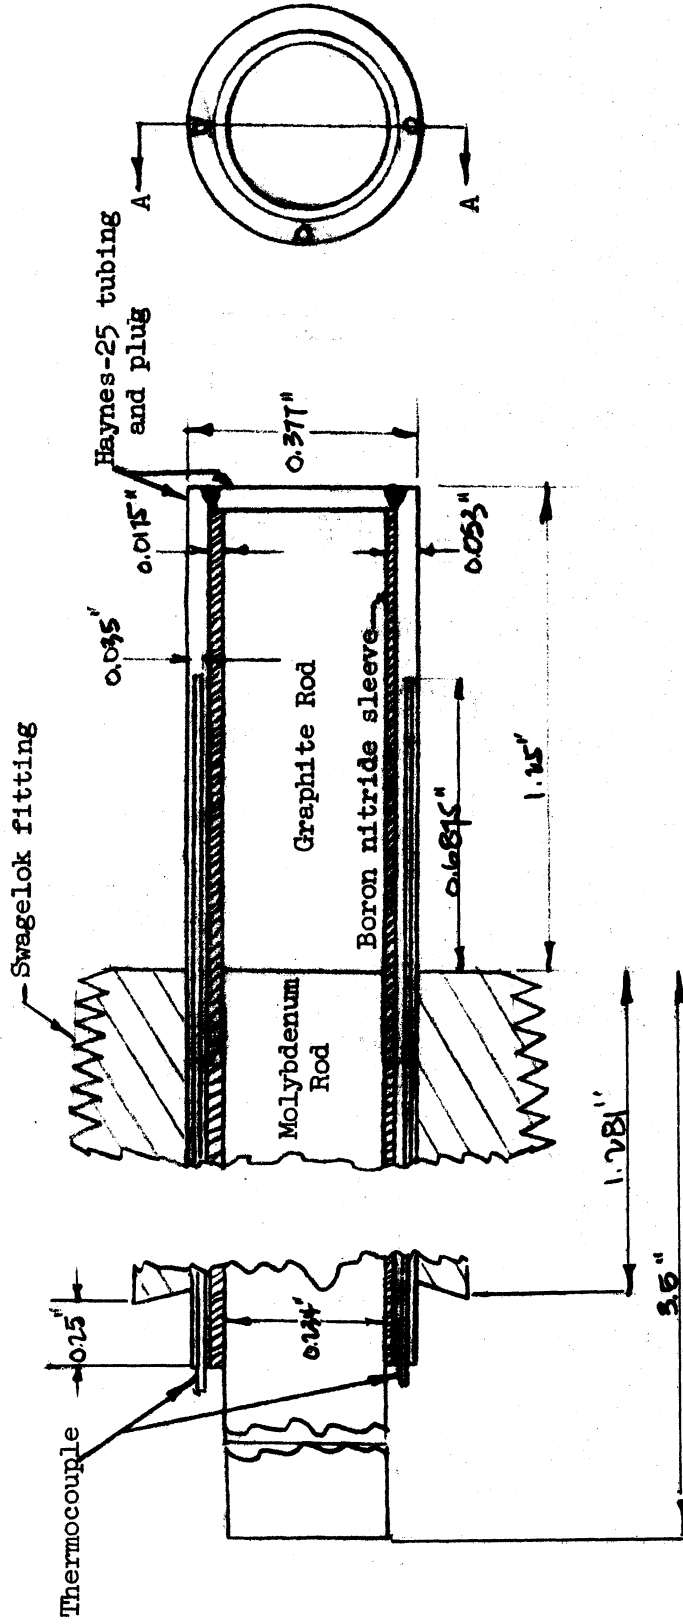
Cross Sectional Drawing of Composite Boiling Tube
